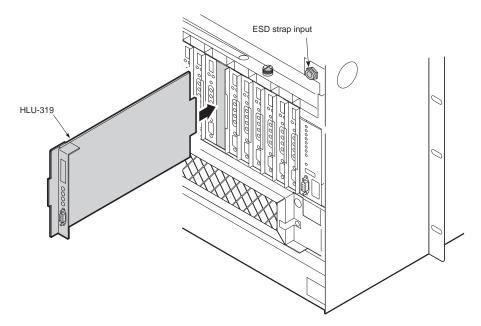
Installing a Line Unit into the Wideband 3190 Chassis
